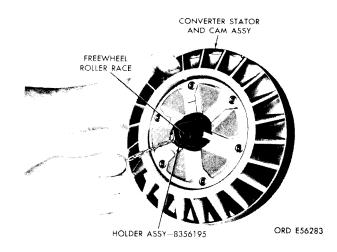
Removing roller holder assembly 4910-572-8688 (8356195).
